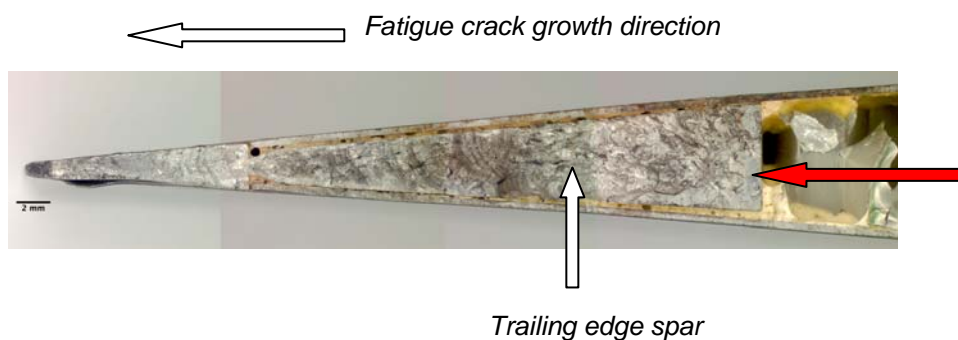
fatigue crack initiation point – crack initiation point indicated by red arrow.
